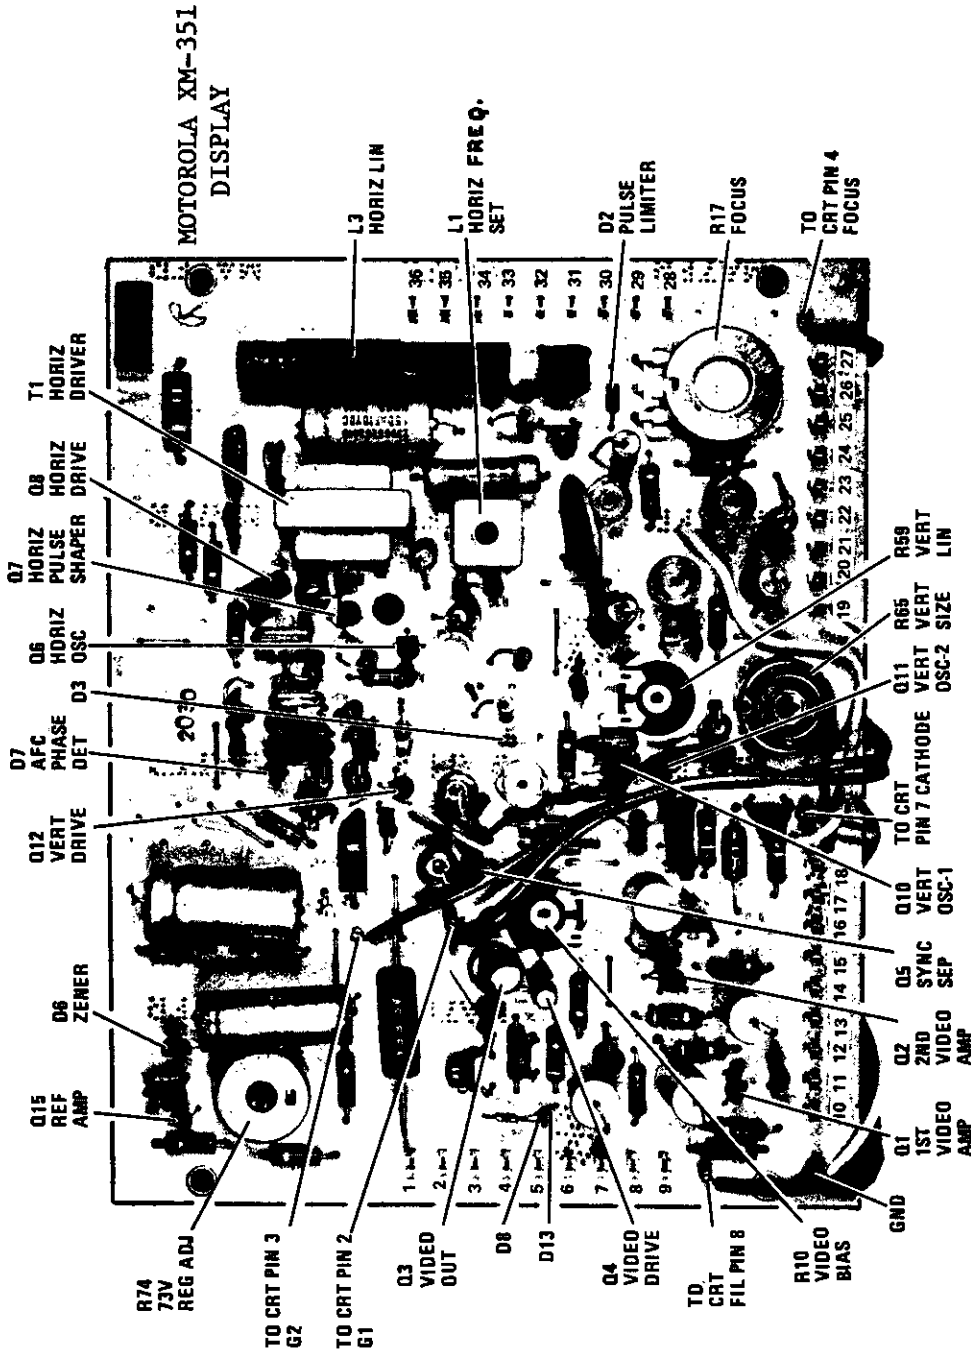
MOTOROLA VIDEO DISPLAY BOARD
